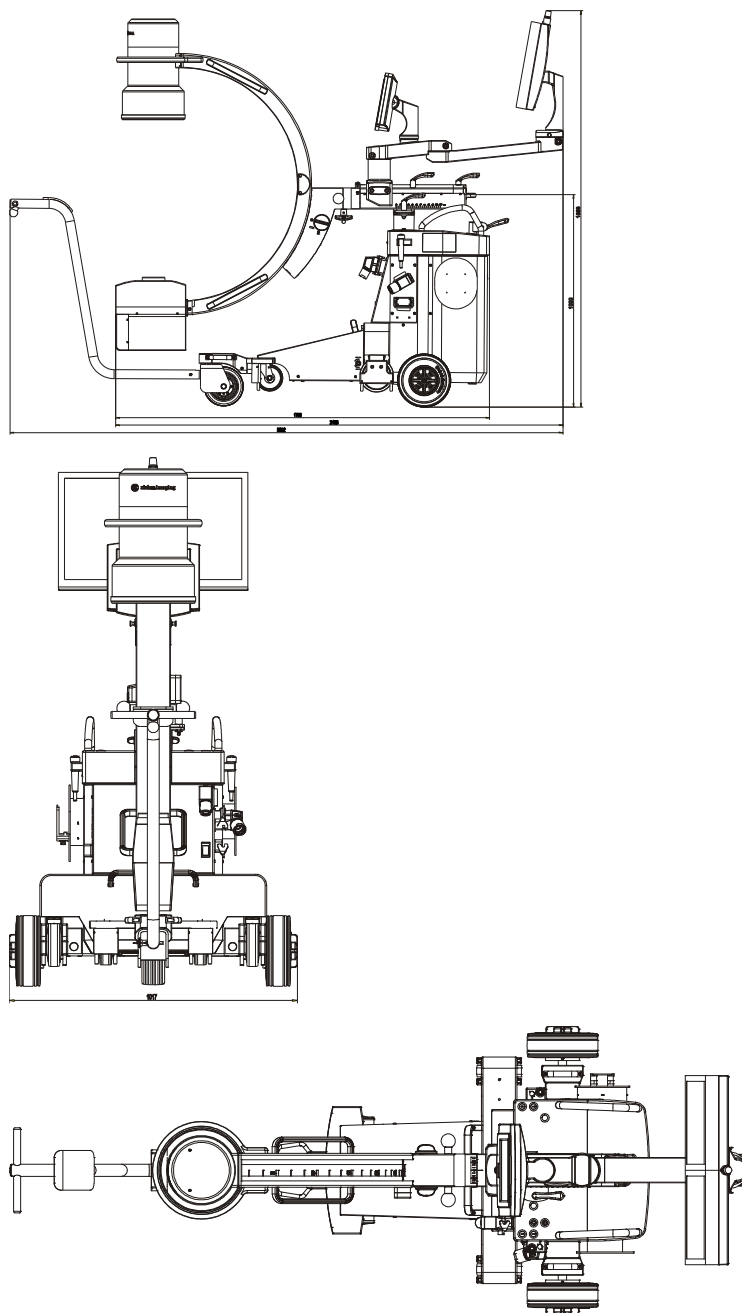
Dimensions of Ziehm Solo Option Portable mobile stand with transport wheels
